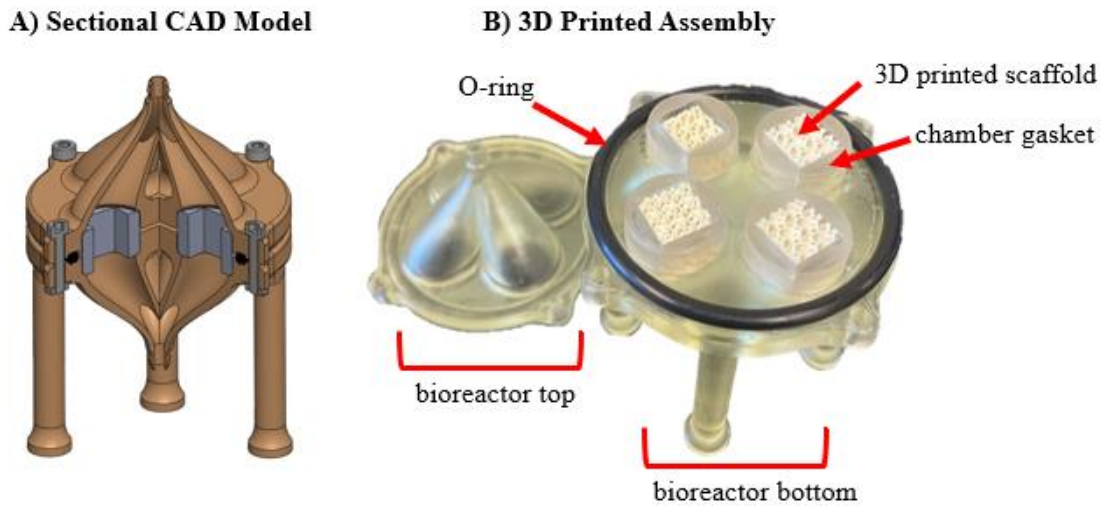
The axisymmetric 4-channel bioreactor design (BR4) is shown as a sectional CAD model (A) to view the interior, and an image is provided of the 3D printed assembly (B).
